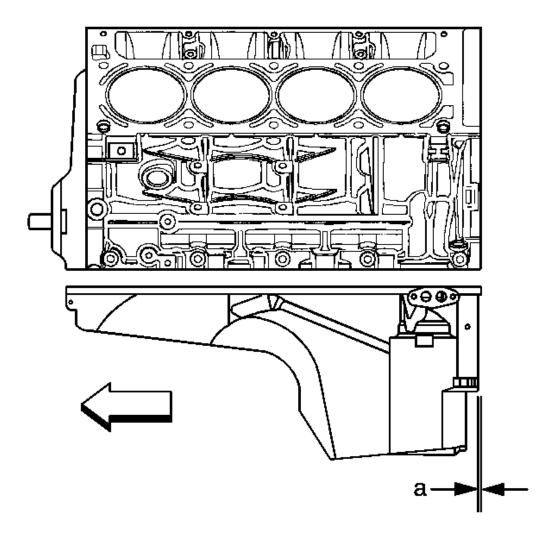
Align Oil Pan Until Rear Of Engine Block And Rear Of Oil Pan Are Flush
